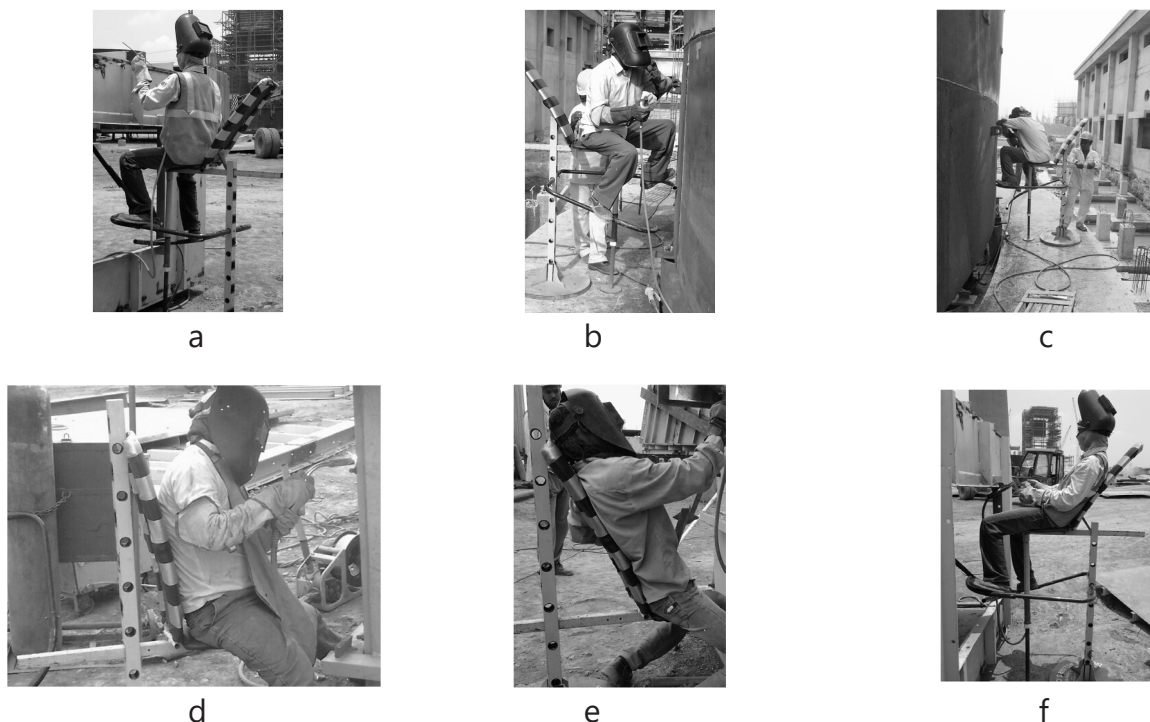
a – welder getting ready to weld at 1.5m height, b – welder getting ready to weld at 1m height, c – another view of figure b,d-welder welding between 0.25 to 1m,e- welder getting ready to do over head welding,f-welder taking rest after welding.
